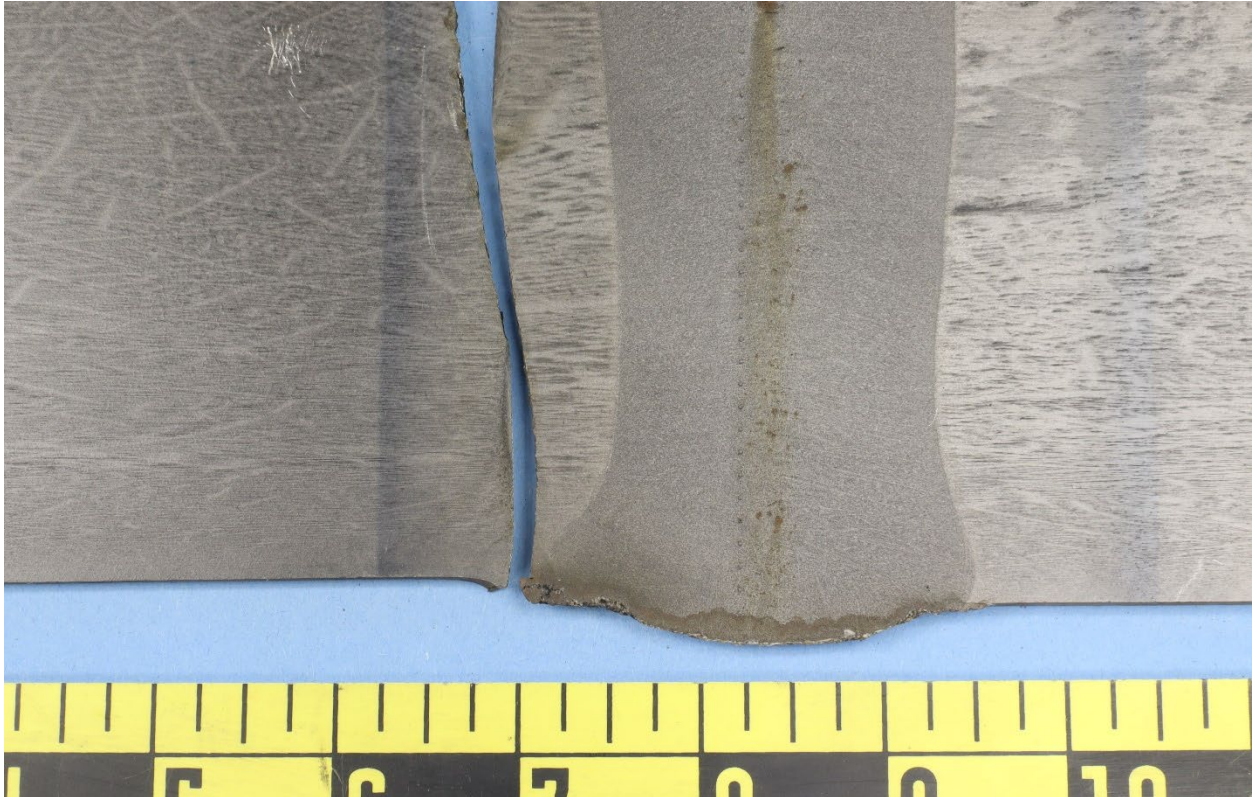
Closer view of the weld on the etched section near the base and the location of fatigue crack initiation.
